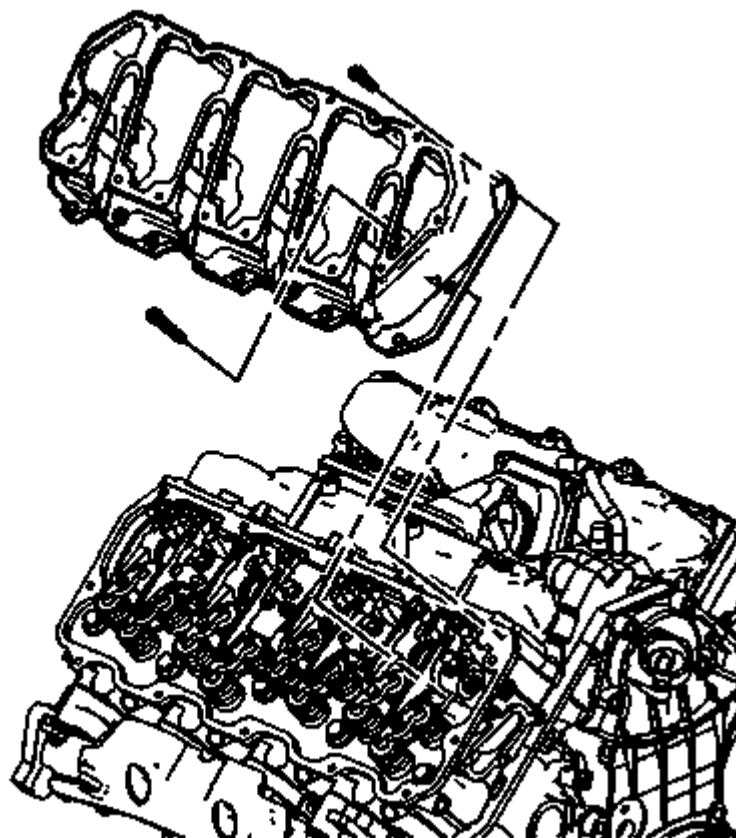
View Of Lower Valve Rocker Arm Cover (Right)
